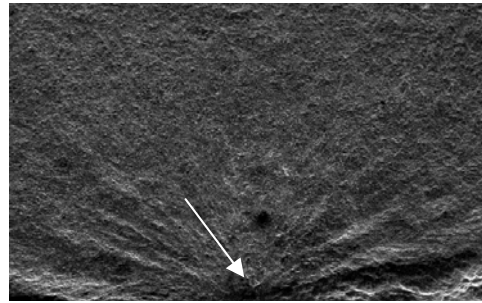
Fracture surface of a LPB treated specimen; the radial crack growth marks actually converge at a point roughly 0.5 mm below the specimen surface (arrow), indicating that the LPB treatment was successful in mitigating the corrosion-pit related crack initiation seen in Figure 1a. Specimen #21, $S_{max} = 170$ ksi ($\sim 1,170$ MPa), $N_f = 1,311,786$ cycles
